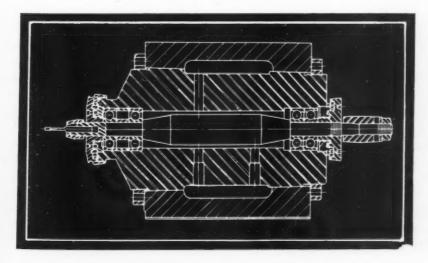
Bearings on high speed grinding wheel spindle are protected by slinger, labyrinth and, in many cases, felt
